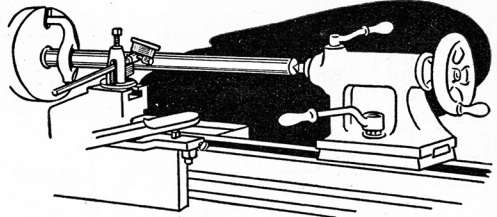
Using a proof bar and dial indicator for checking centers alignment.
